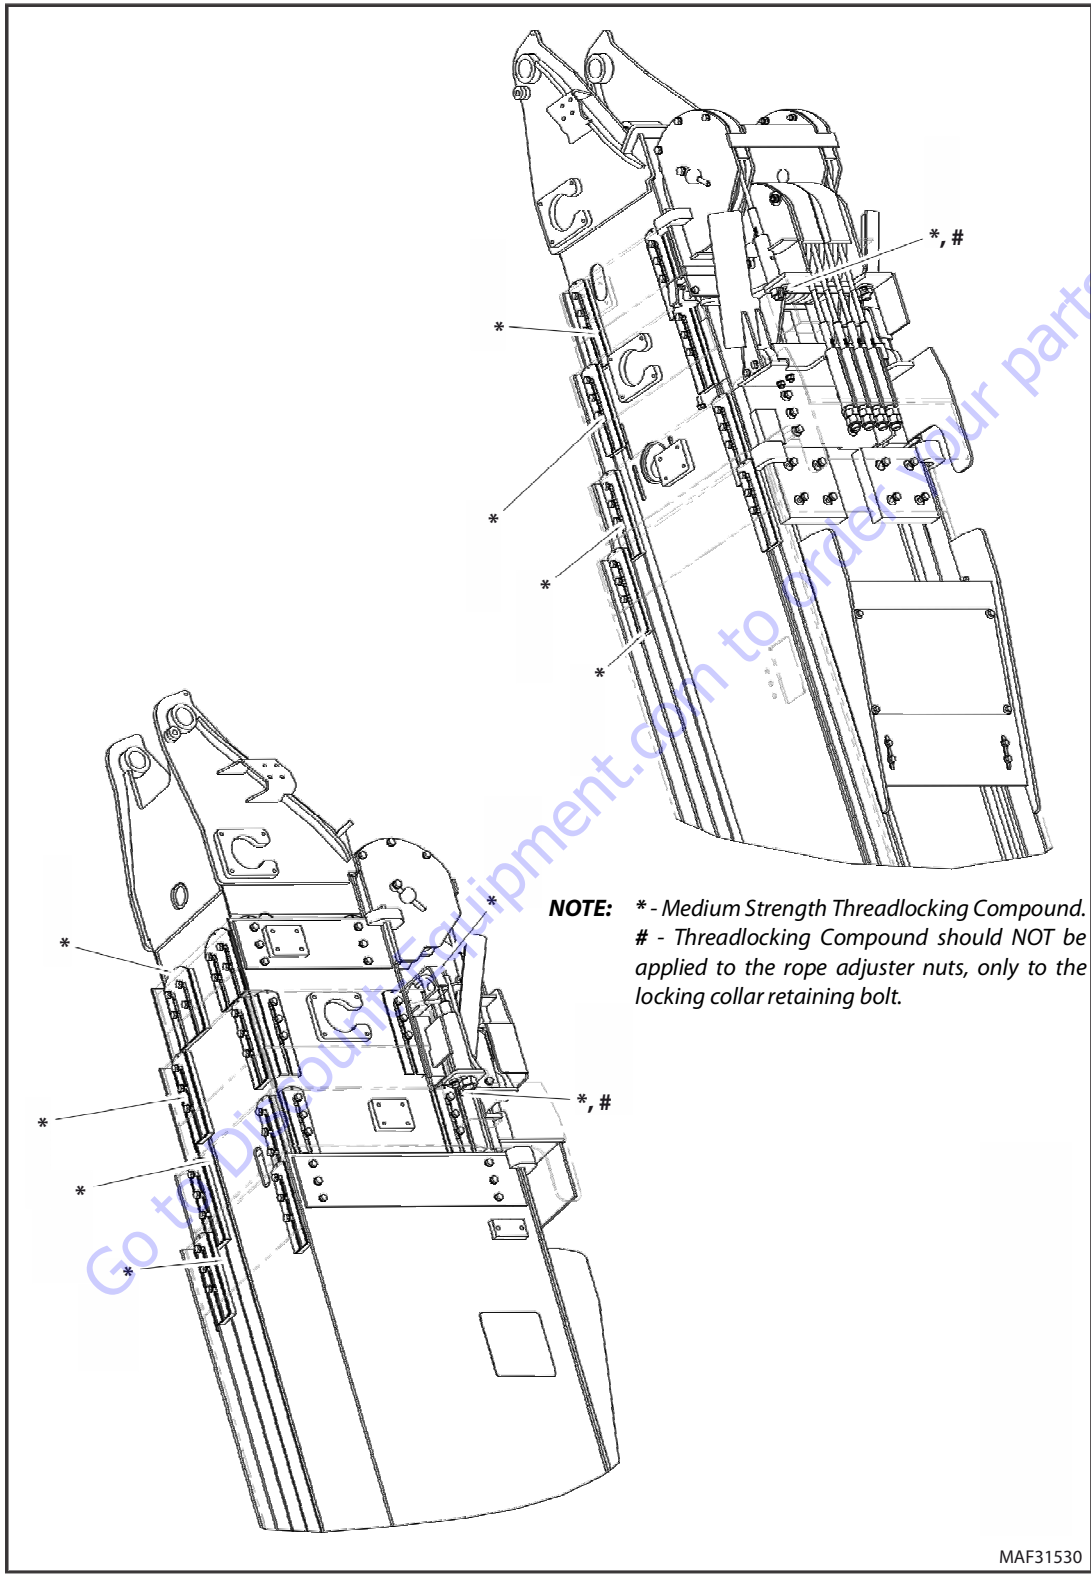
Locations for Threadlocker Application - Sheet 5 of 5
